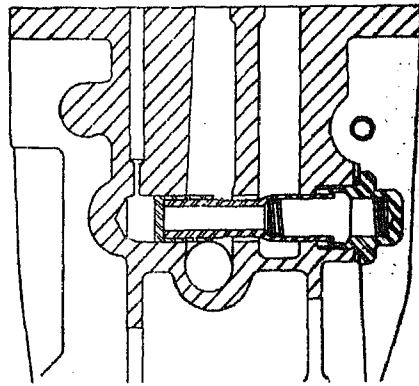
Lubricating oil pressure regulator by-pass — warm-up position
